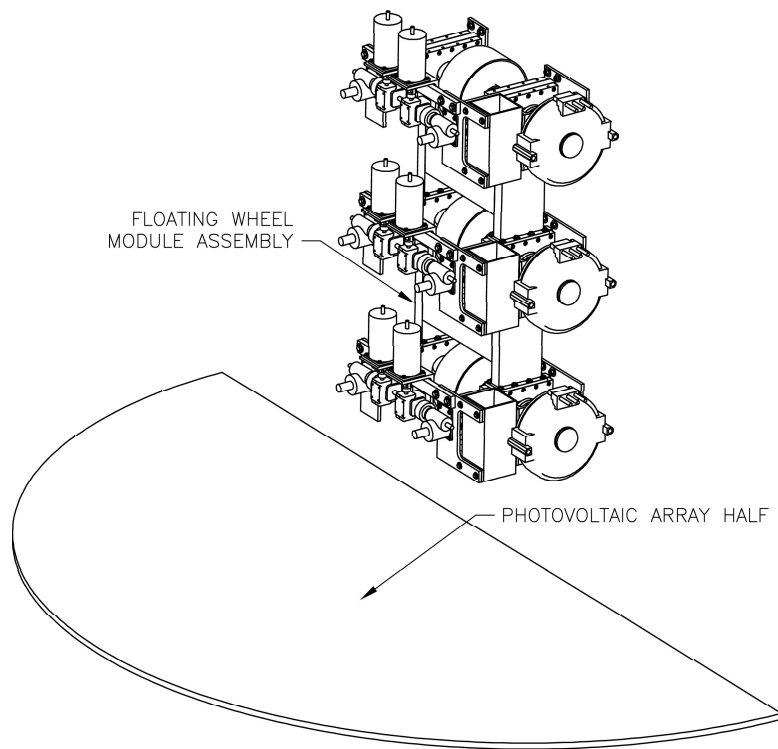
The space elevator ribbon poses unique assembly challenges because it effectively has no ends. The climber must be assembled in halves on opposite sides of the ribbon and the halves bolted together. This picture shows what the floating wheel module assemblies on one side of the ribbon would look like. No structure is shown connecting the traction drive to the PV array.
